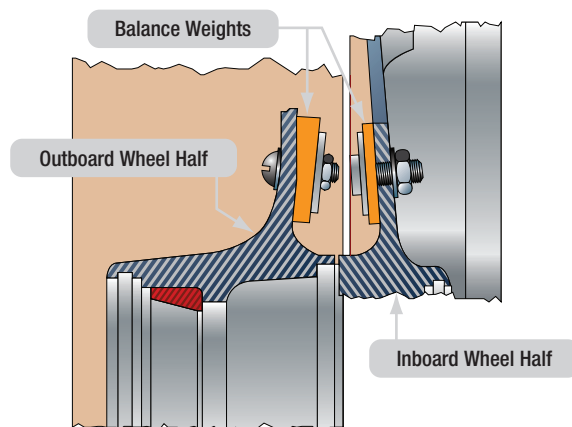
Two piece aircraft wheels are statically balanced when manufactured and may include weights attached to each wheel half that must stay with the wheel during its entire serviceable life.
